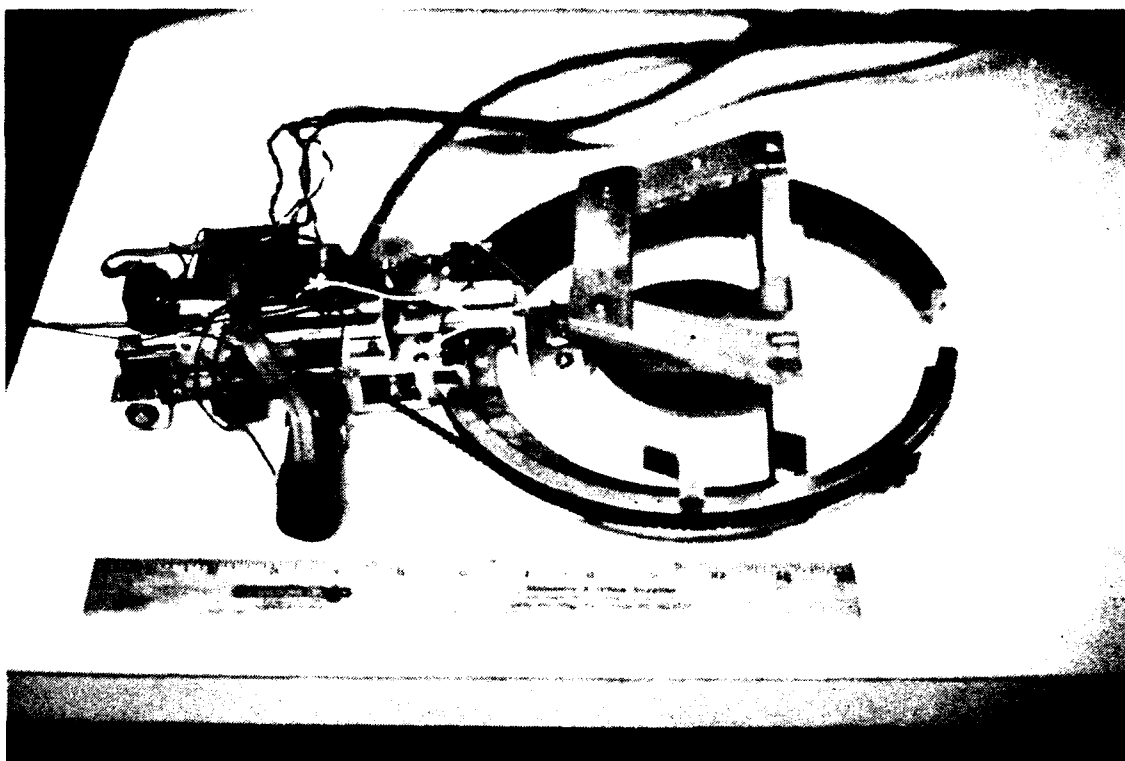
PROTOTYPE MOTORIZED JISD BOSS WELD SCANNER
